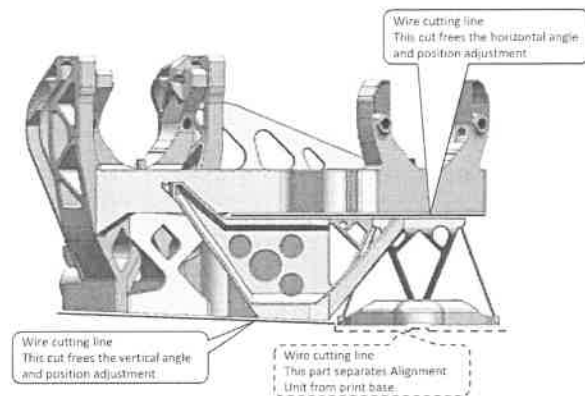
Side view showing wire cutting locations to a) free flexure elements and b) free the assembly from the base
